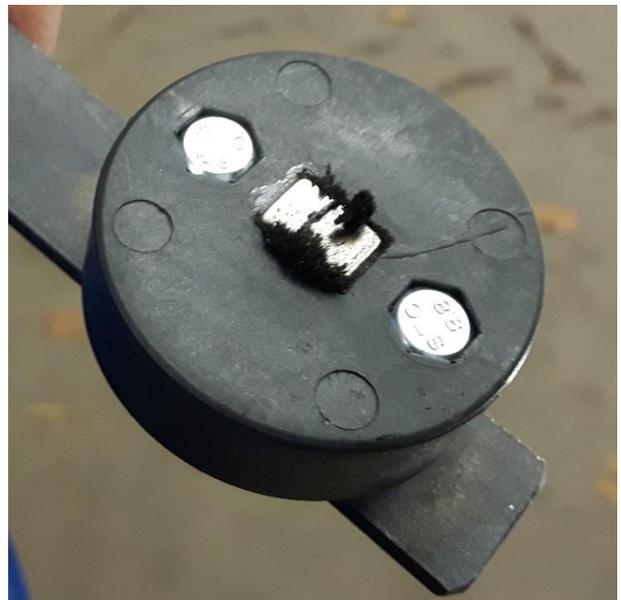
DIRTY WHEEL ANGLE SENSOR MAGNET.
